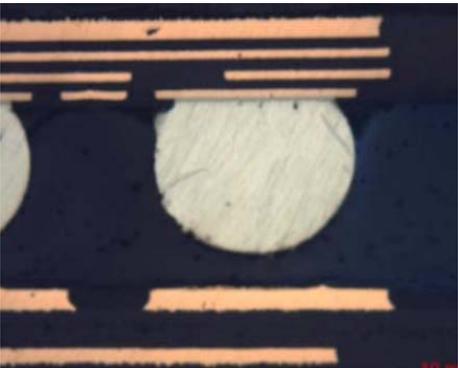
Example of BGA open joints. From [IPC Sd IPC-7095C]
